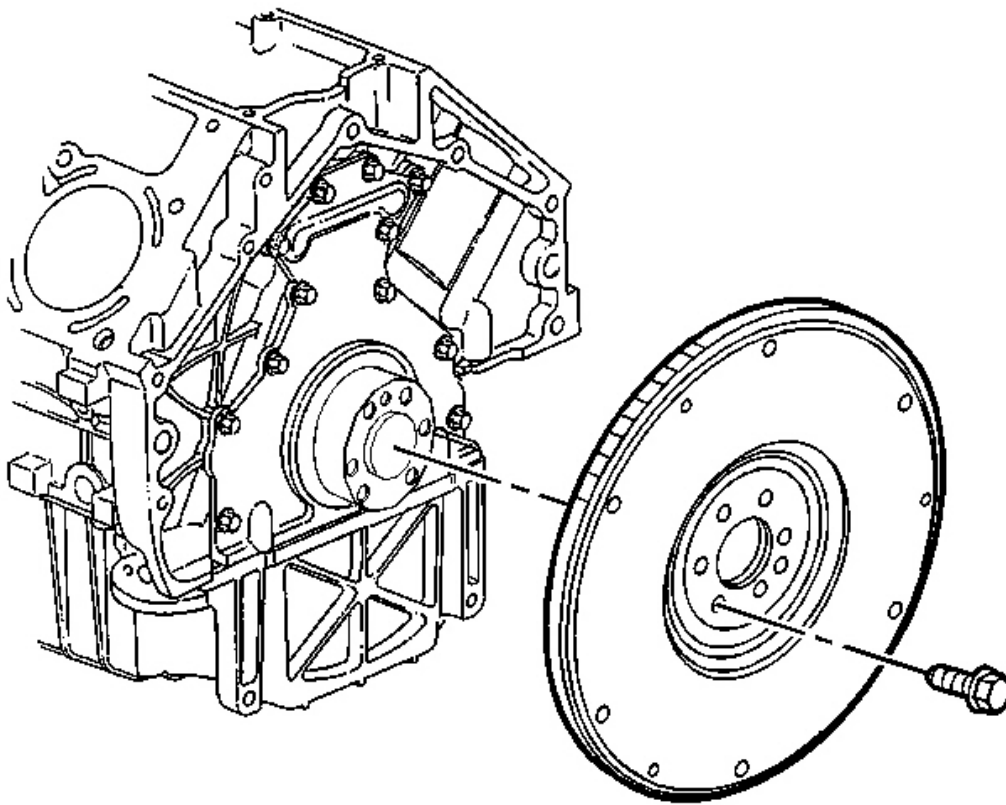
Engine Flywheel & Bolts (Manual Transmission)
